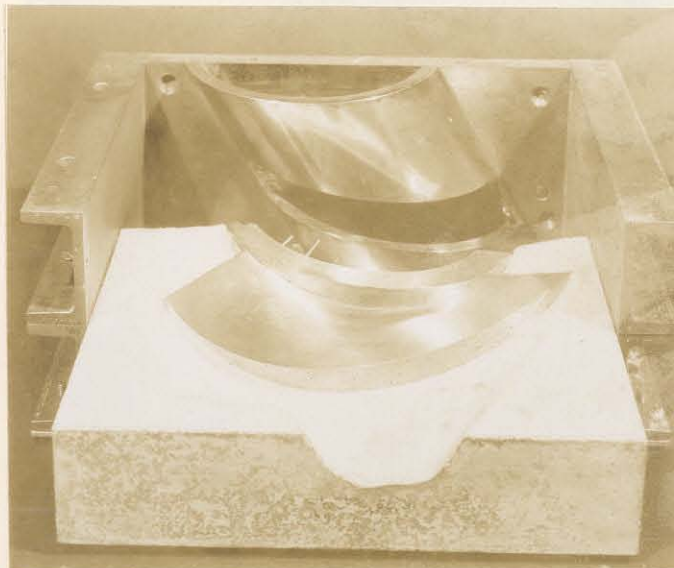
Blade cast onto hub segment that fits into slot of hub piece in mold box and into impeller hub thus insuring correct orientation.
